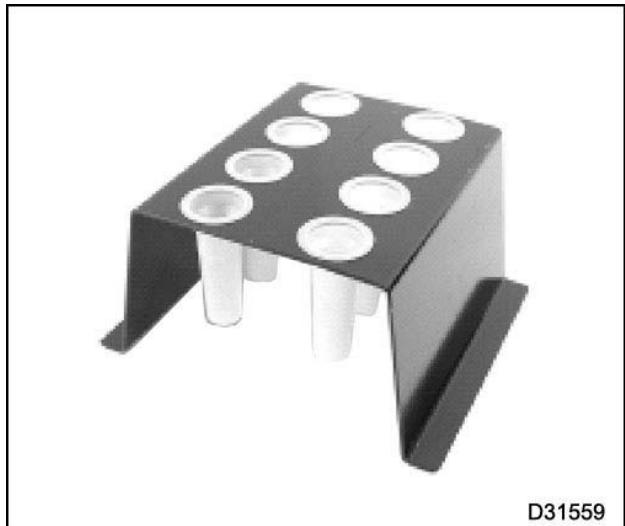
Fuel Injector Rack Holder ZTSE4299B
